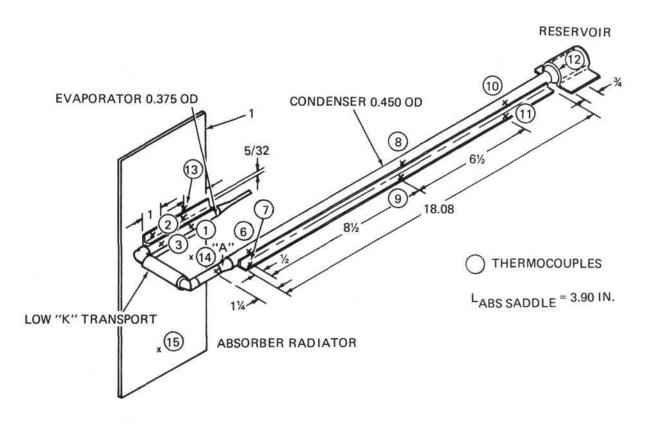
Diode Heat Pipe, Thermocouple Layout - Engineering Model
